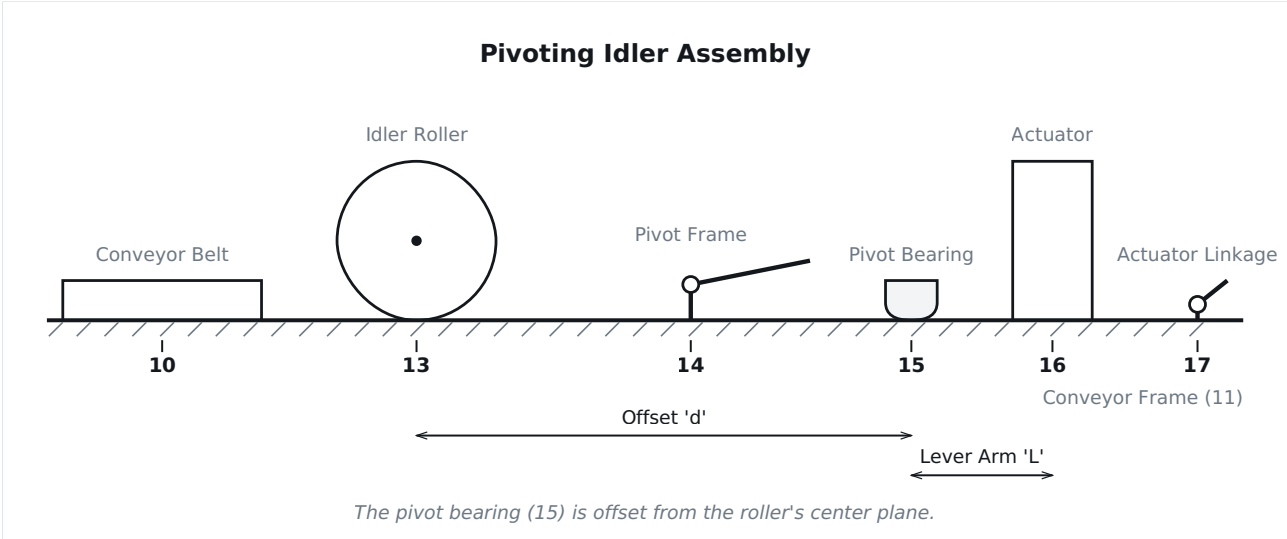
This drawing shows the geometry of the pivoting idler and its interaction with the conveyor belt. PNG
